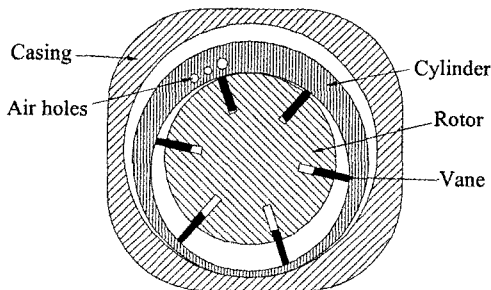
Cross sectional view of the rotor used in a vane-type air tool
